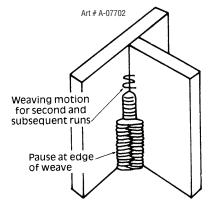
Multi Run Vertical Fillet Weld
